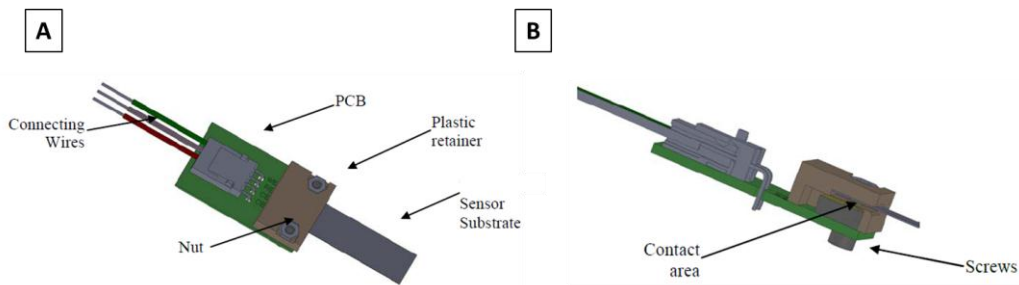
(A) Connector 3D CAD top view. (B) Connector 3D CAD section view.
